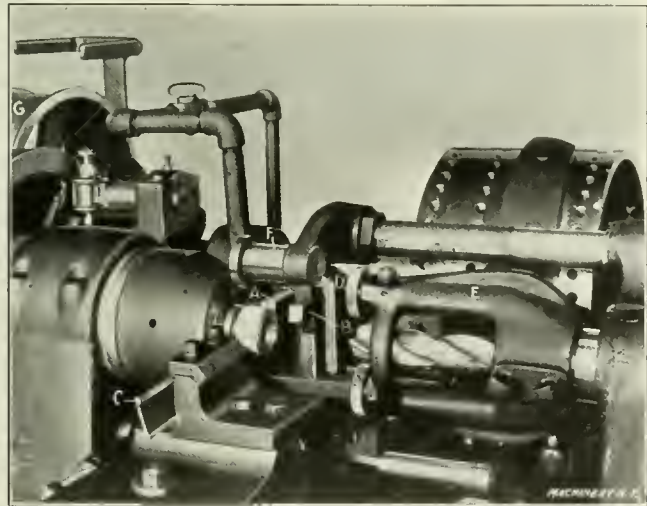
Arrangement of Tools for Making Knurled Nut Blanks shown in Fig. 1
